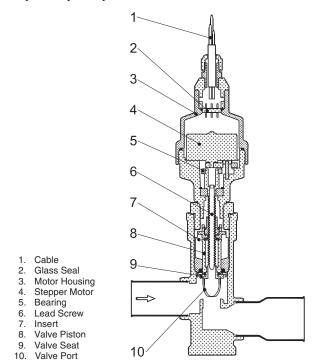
Cutaway View of the Electronic Expansion Valve
